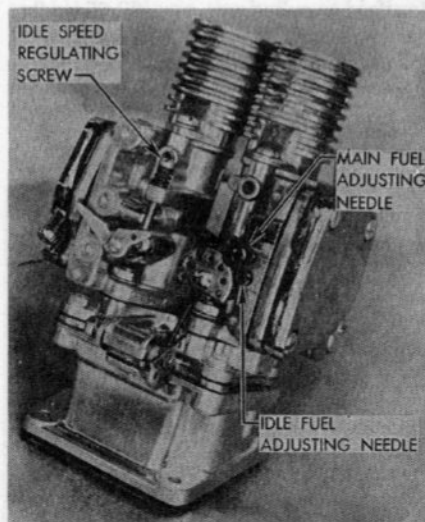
View of dual carburetor installation on Models MC-40 and MC-70 showing carburetor adjustment points. Main fuel adjusting needle and idle fuel adjusting needle are on rear side of left carburetor.
